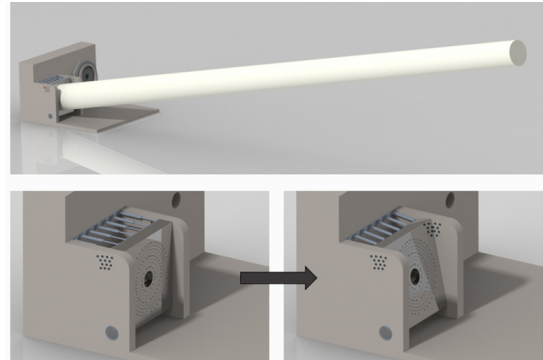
Wind turbine blade test stand with the designed variable angle mounting plate.
